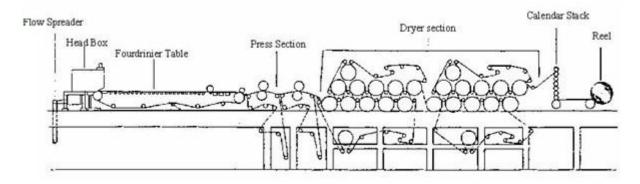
A classic paper manufacturing machine (Twede and Selke, 2005, p.211).
